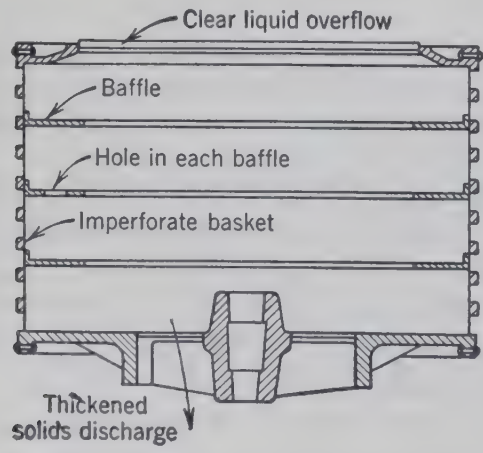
Solid or imperforate basket.¹ Feed is to center.
